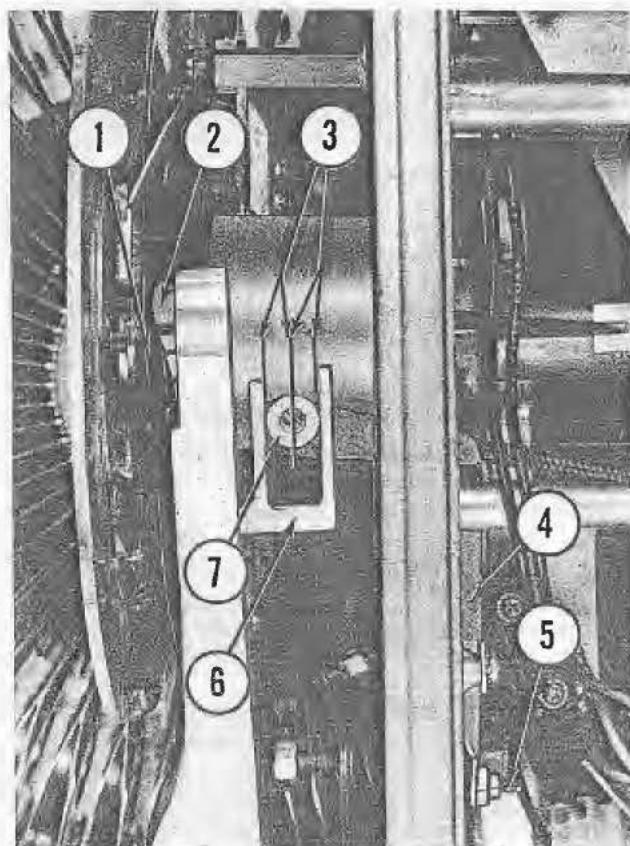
TONE ARM LATCH LEVER ADJUSTMENT
